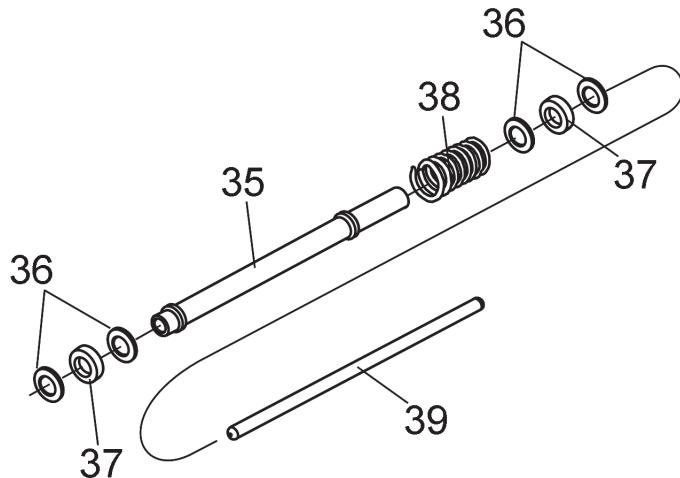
Updraft Cylinder Pushrod Tube Assembly A B C
